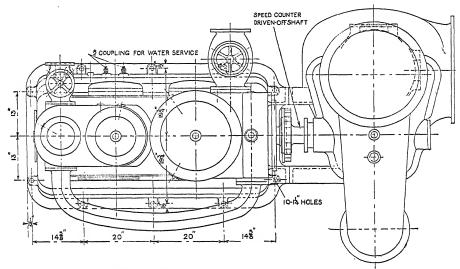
a .- Plan of Compound Marine Pumping Engine
